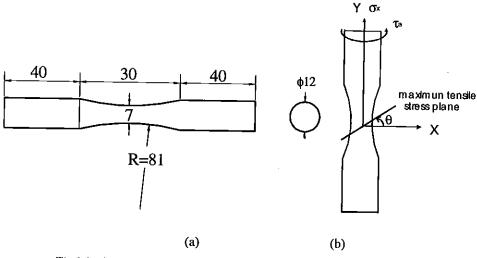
(a) Specimen geometry (b) coordinate system, Dimensions in mm.
